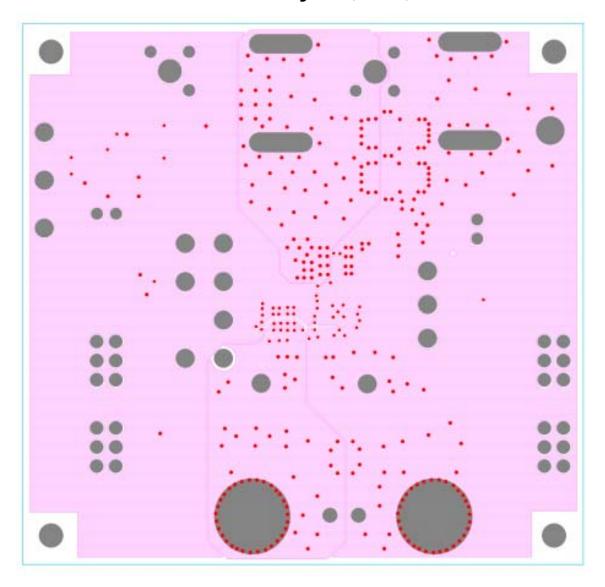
PCB - INNER LAYER 4 (TOP VIEW)
